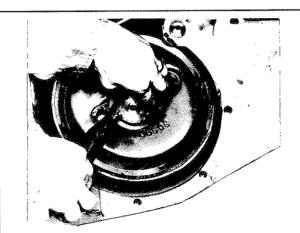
INSTALLATION OF HYDRAULIC BRAKE ASSEMBLY, POWER CONTROLLED WINCH (Sheet 2 of 2)
